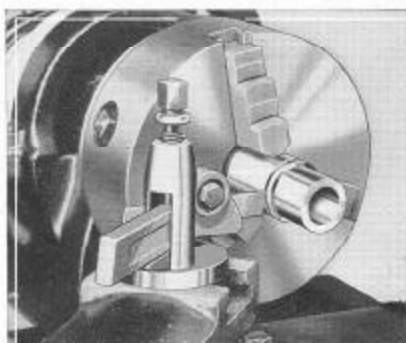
Cutting-off a Bushing, made complete, in one set-up, in Chuck.
